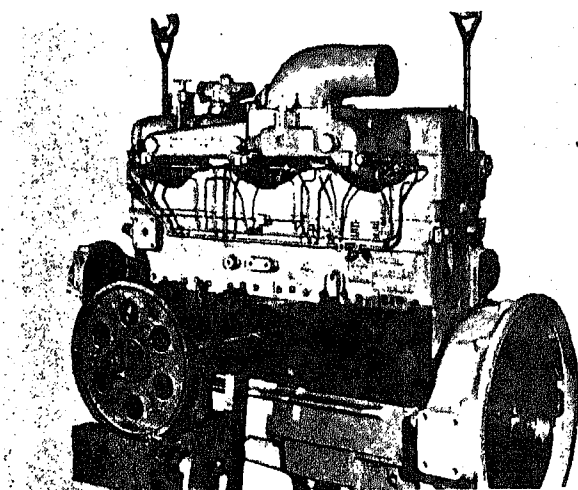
Lifting and mounting engine to Engine Stand N20010
